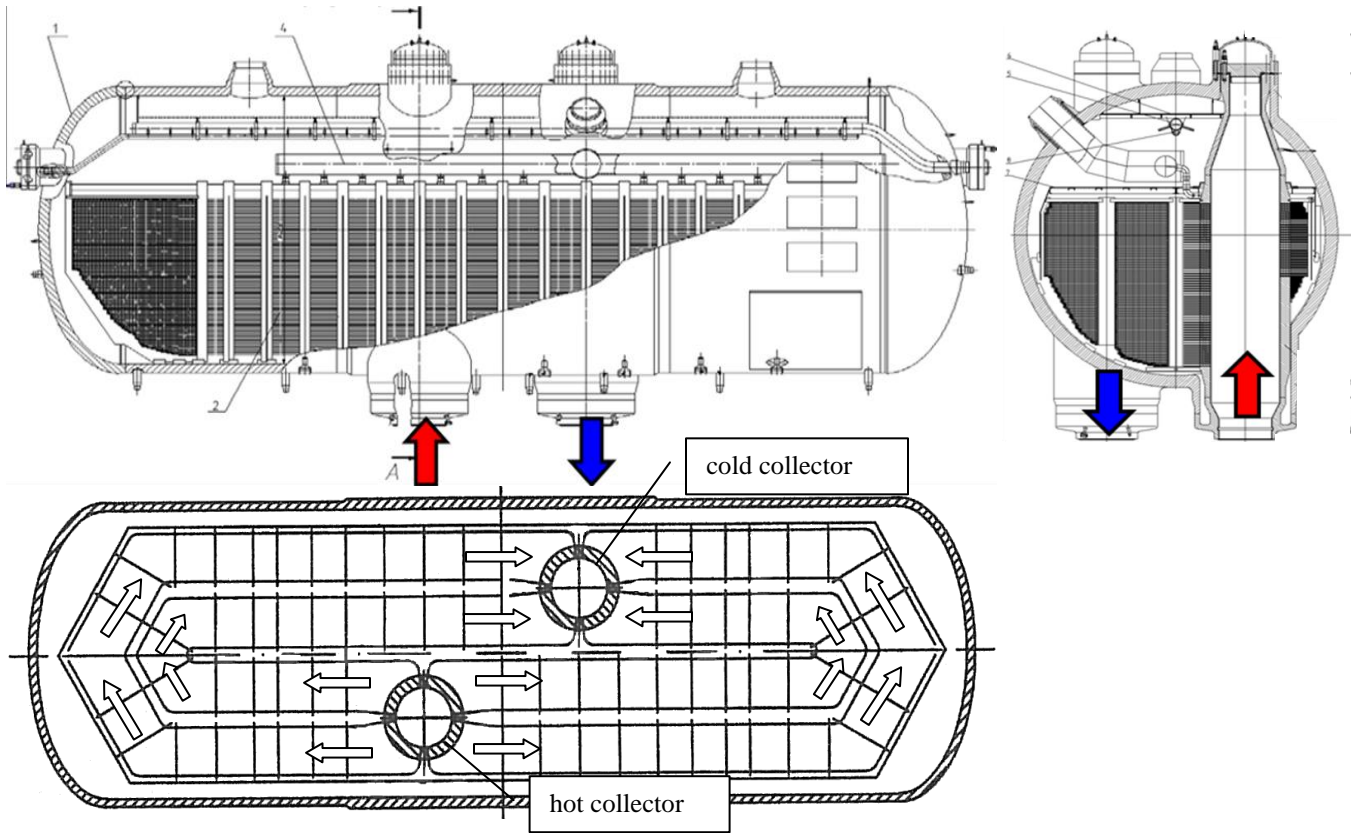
WWER 1000 STEAM GENERATOR WITH SHOWN TUBE BUNDLE SHAPE [7]
